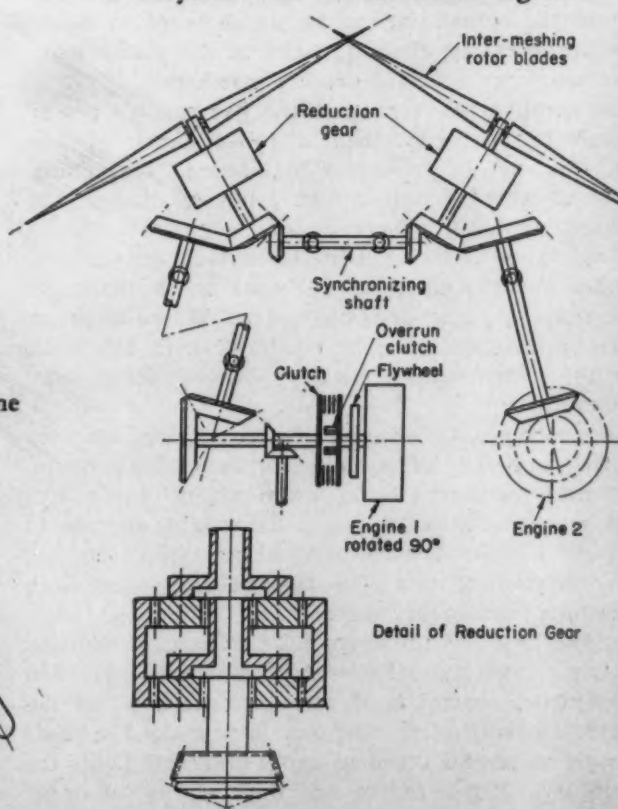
Twin laterally disposed rotor drive system with two horizontal engines
